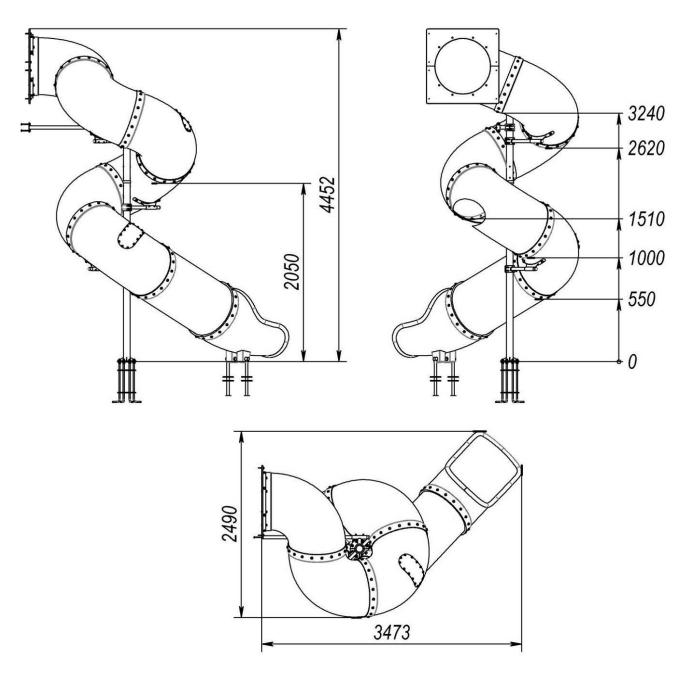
Assembly scheme of slide 2m. (Additionally assembly scheme is in the Appendix)
